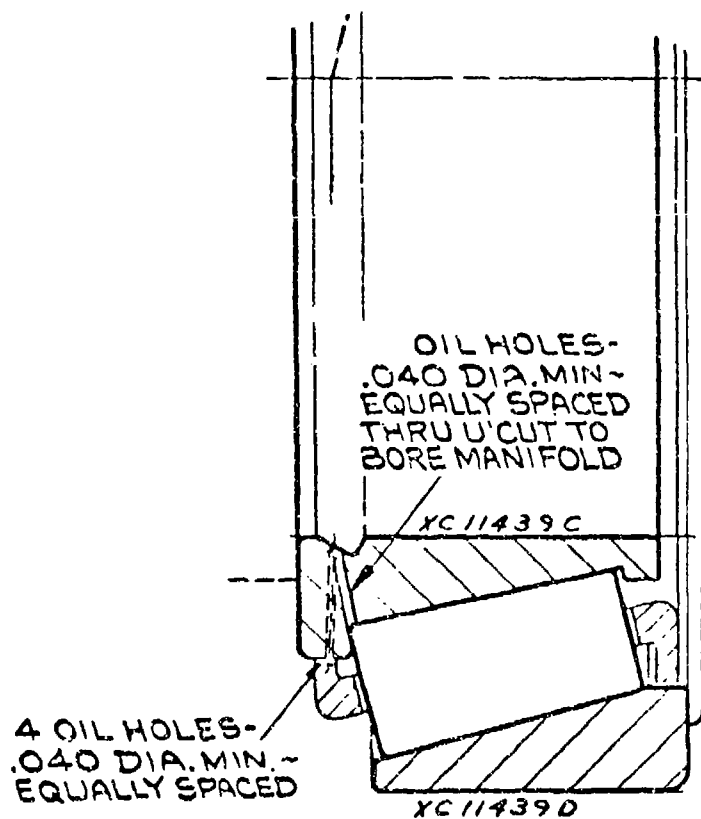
Modified HM926700-Series Bearing With 17 Radial Holes to the Rib Face - Z Type Machined Cage
